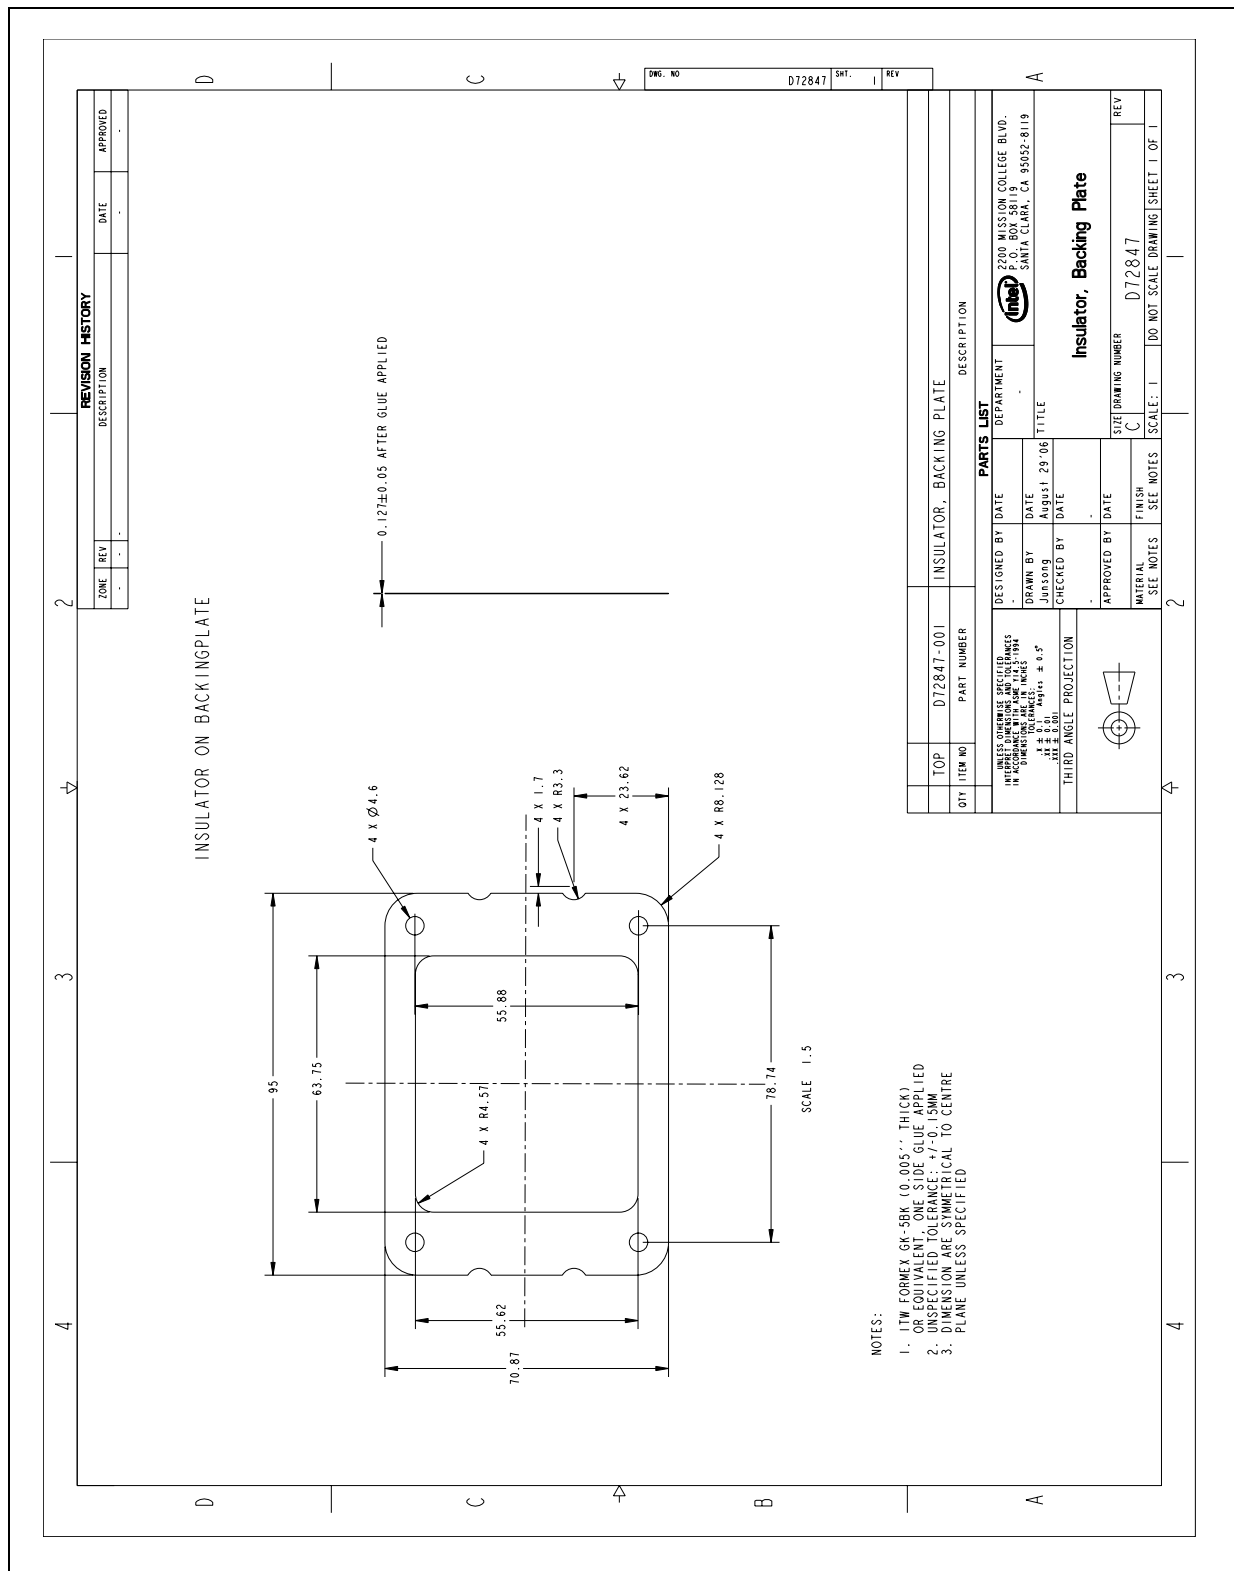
Intel 7300 Chipset MCH Heatsink Backplate Insulator Drawing
